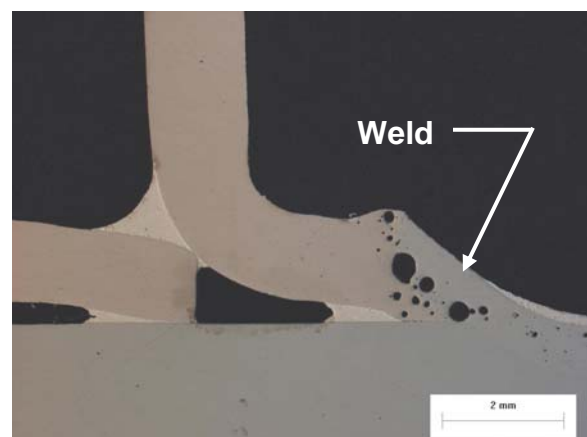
Assembly #5 Braze Joint Voids with Porosity in Adjacent Weld
